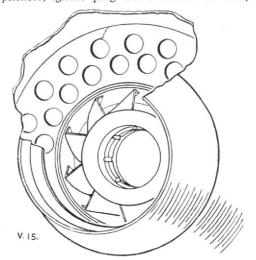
Grid in type 4 flame tube head, Ghost 48 Mk. 1 only.
